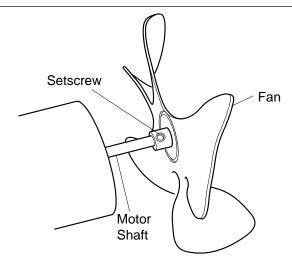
Fan, Motor Shaft, and Setscrew Location
